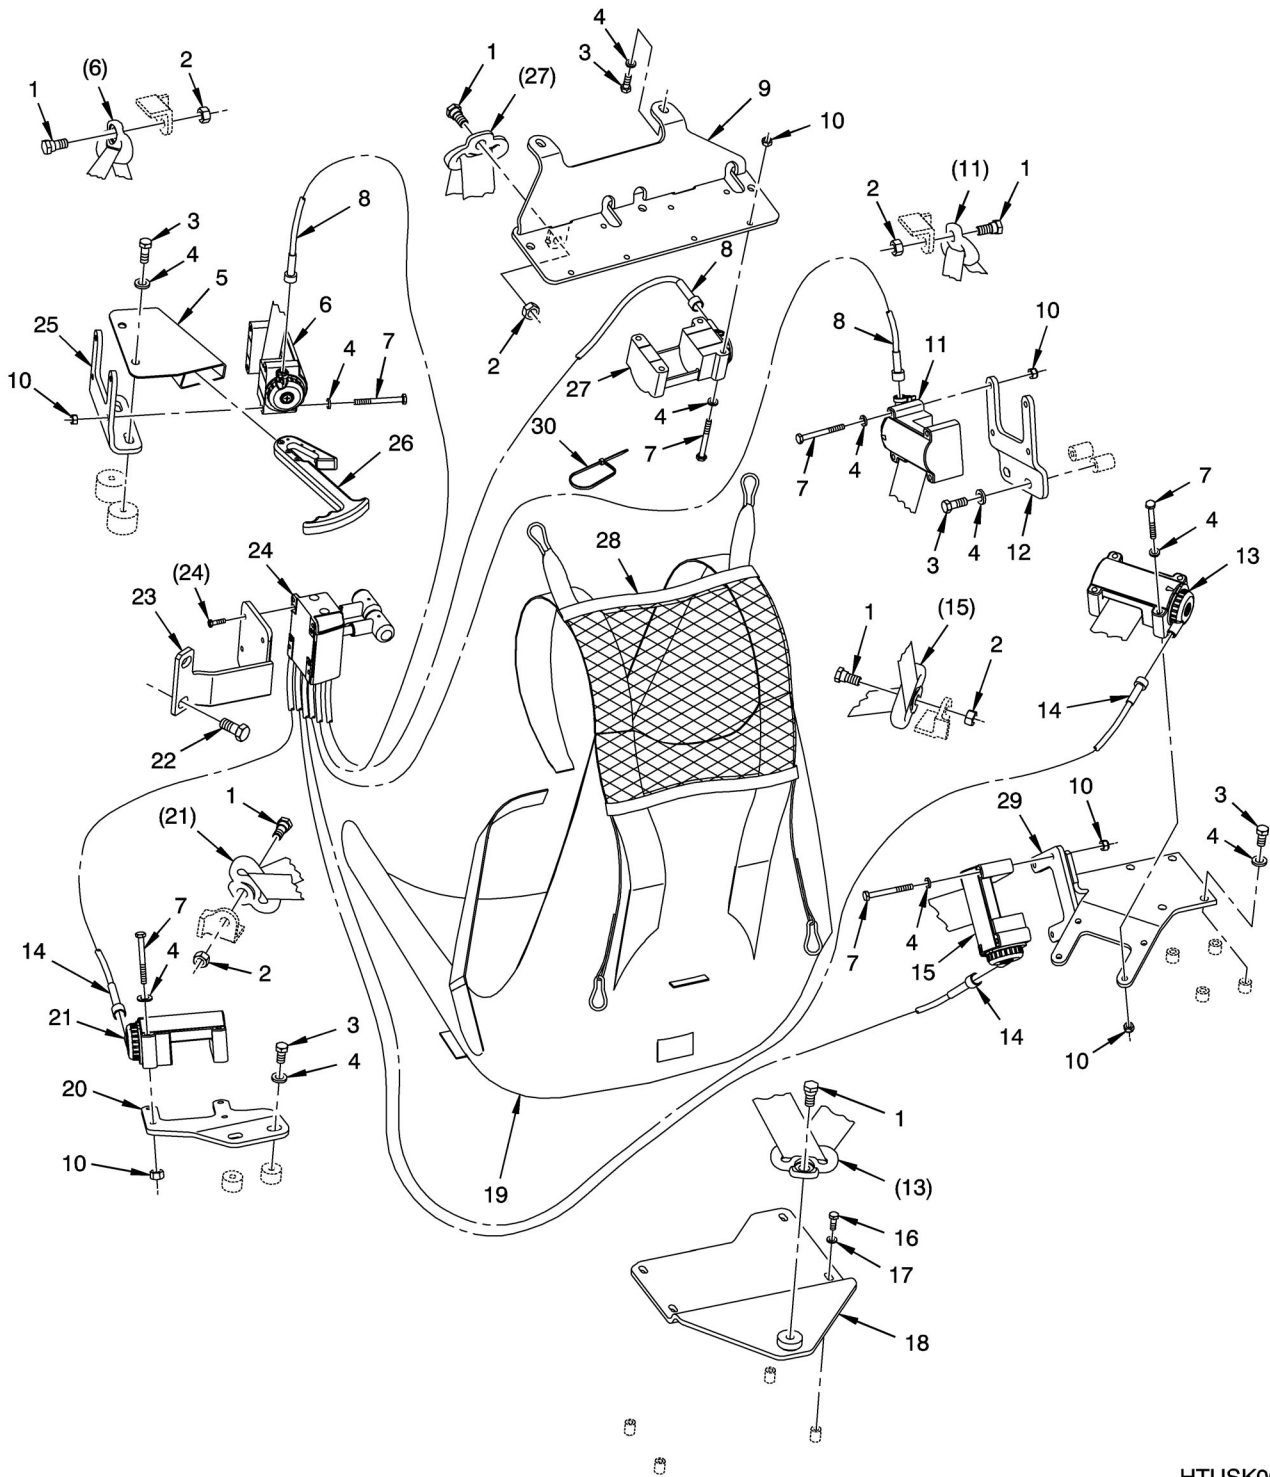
F04. EMERGENCY ENGINE SHUTOFF VALVE CONTROL HANDLE AND RELATED PARTS
